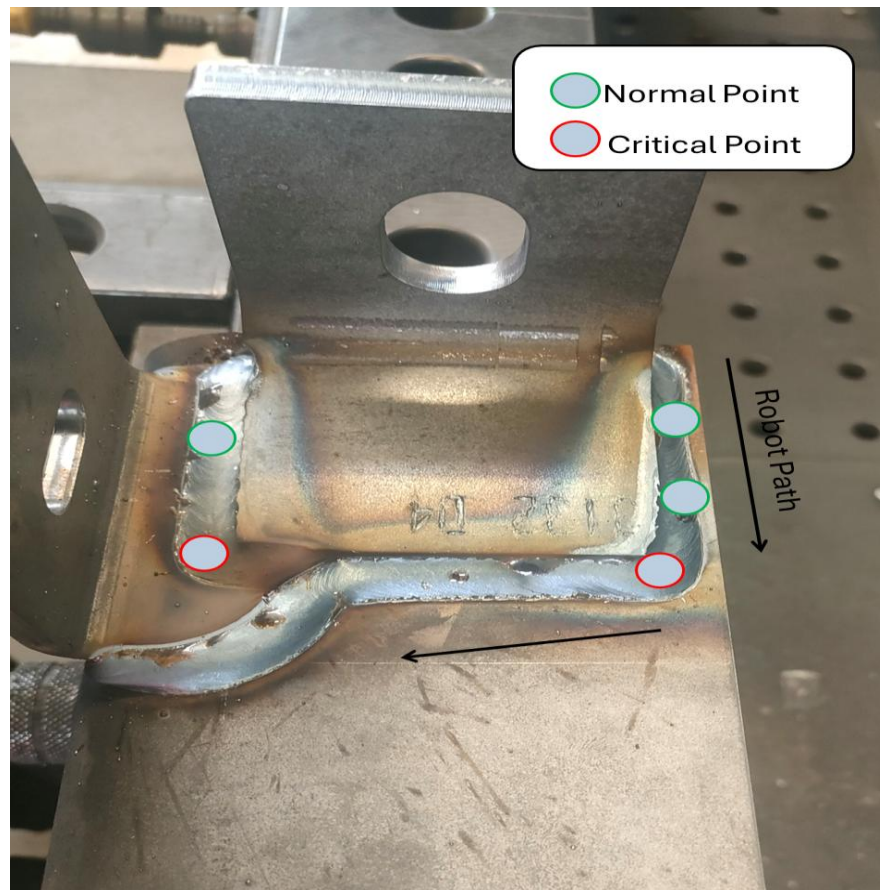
Workpiece with identification of critical and normal weld points
